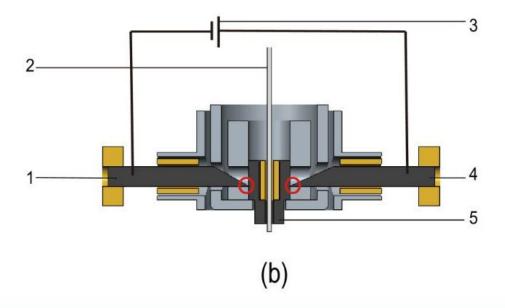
(b) macroscopic schematic (1: heating cathode; 2: metal wire; 3: DC power supply; 4: heating anode; and 5: printing nozzle).
